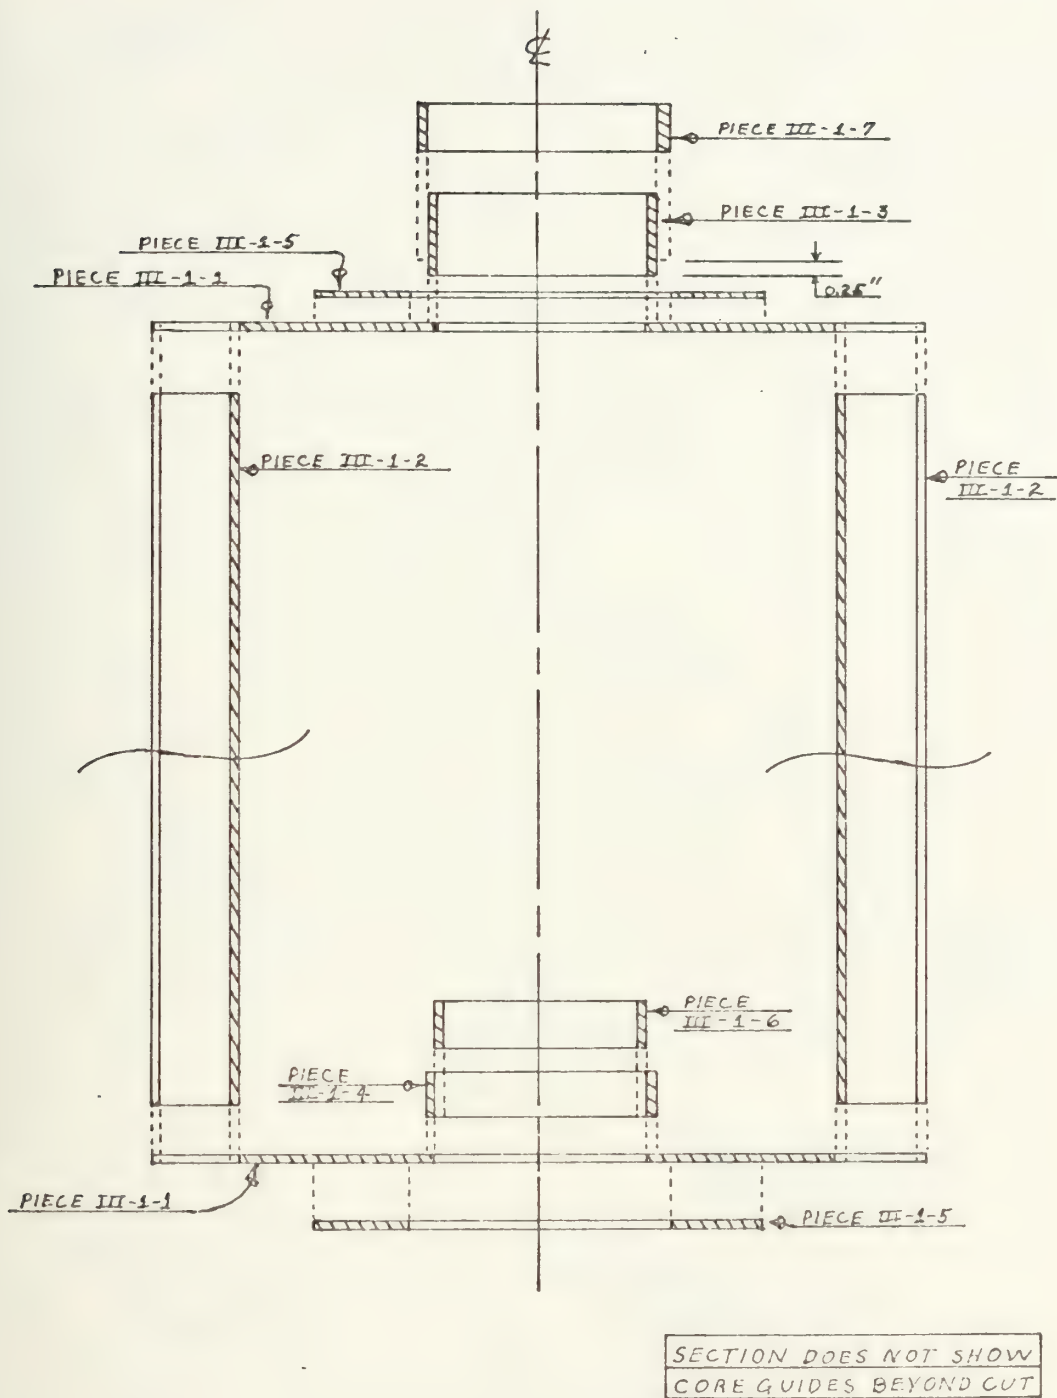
SECTION A-A, SHOWING ASSEMBLY OF PIECES
